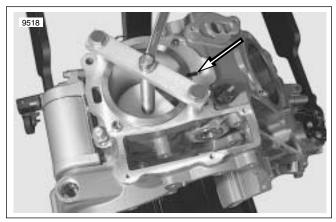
Mark Case and Cylinder Liner and Install CYLINDER LINER REMOVER/INSTALLER (HD-45313)
